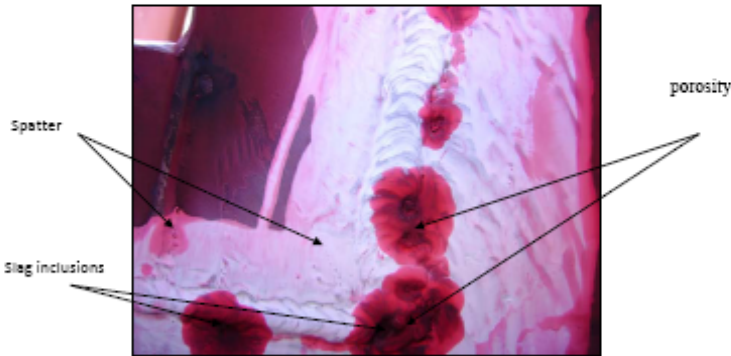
welding defects – porosity-spatter-non metallic inclusion.
